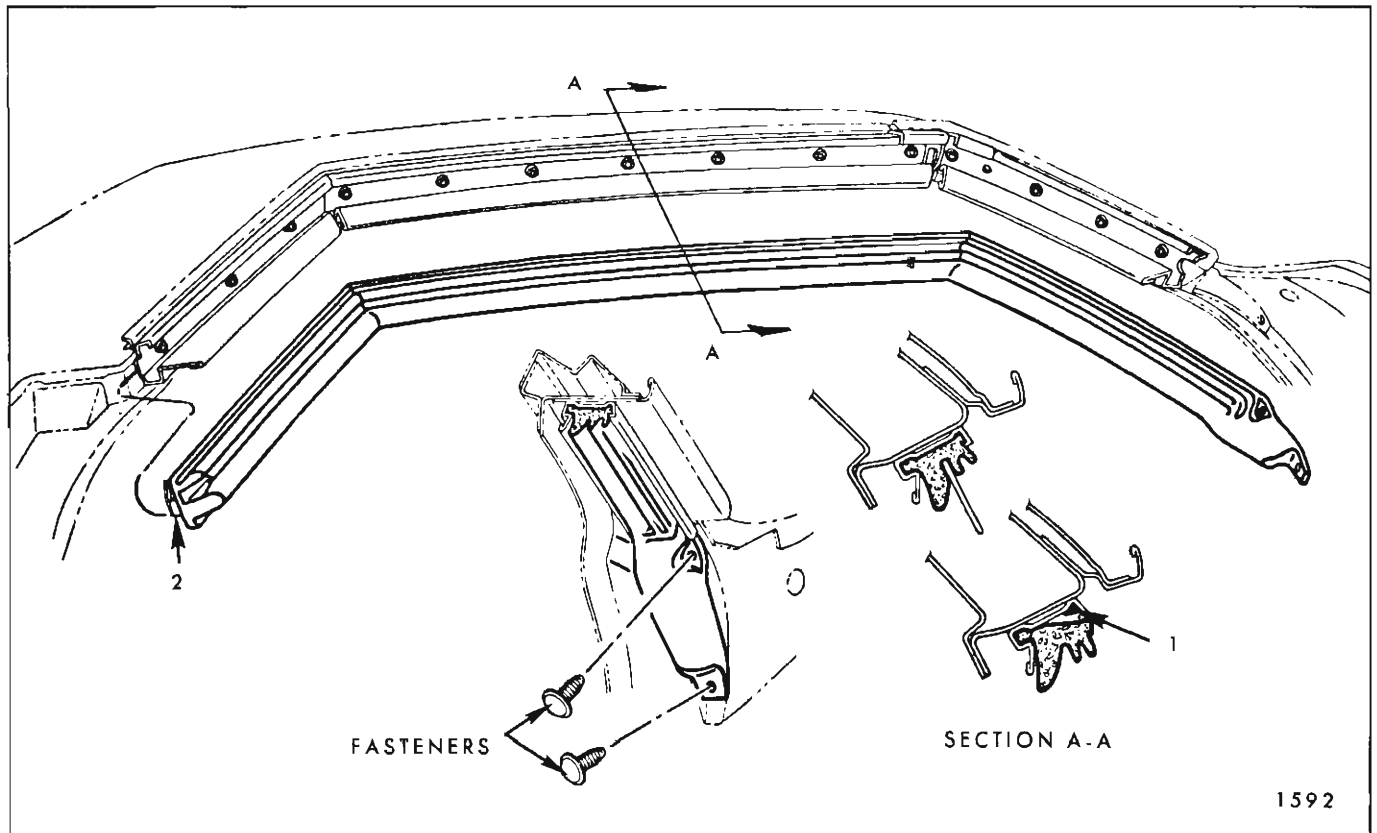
D26—Side Roof Rail Weatherstrip - "39" Styles
